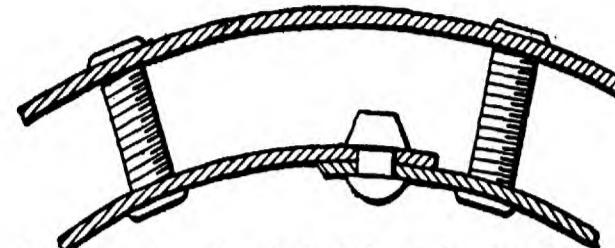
Proper Location of Staybolts Adjacent to Longitudinal Joint in Furnace Sheet.
